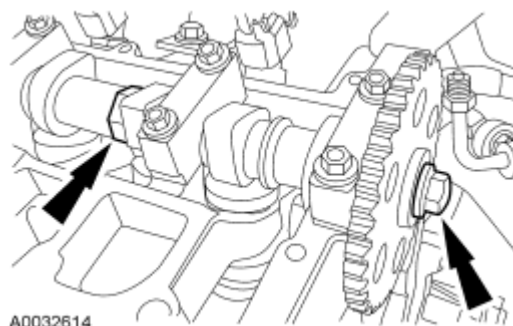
Locating Cam Holding Area And Sprocket Bolt
